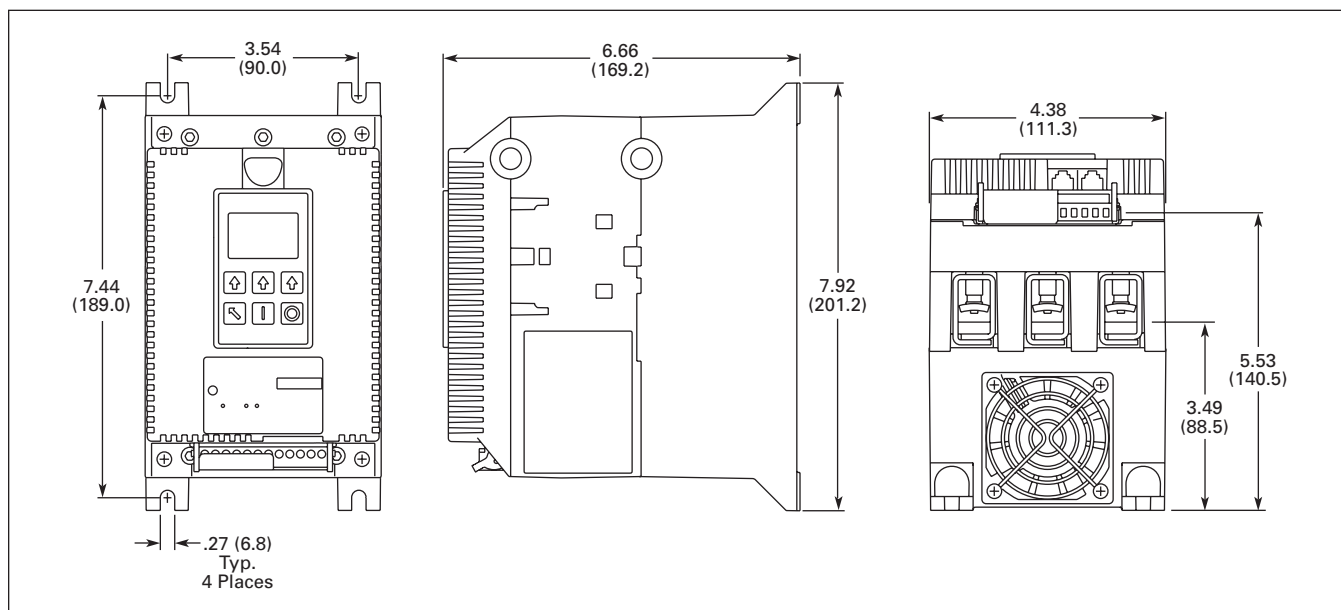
R-Frame (110 mm) S811 Approximate Dimensions in Inches (mm)
